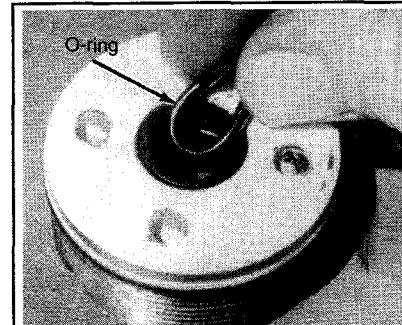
Inserting the O-ring into the trim cylinder cap.
